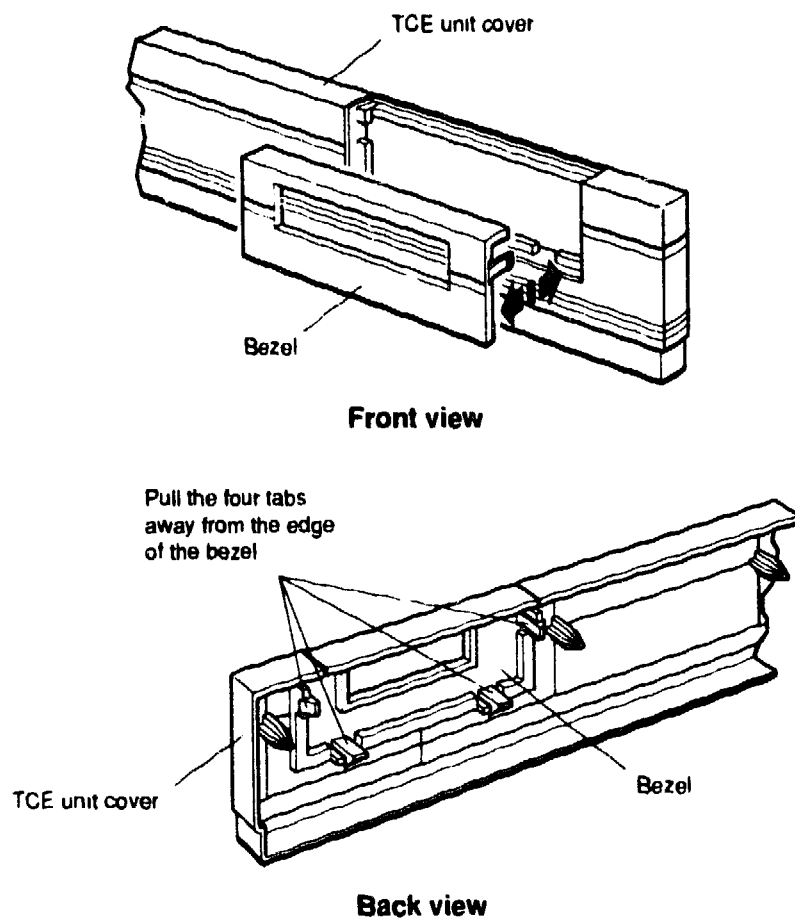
shows how to remove and install a bezel in the TCE unit cover.
